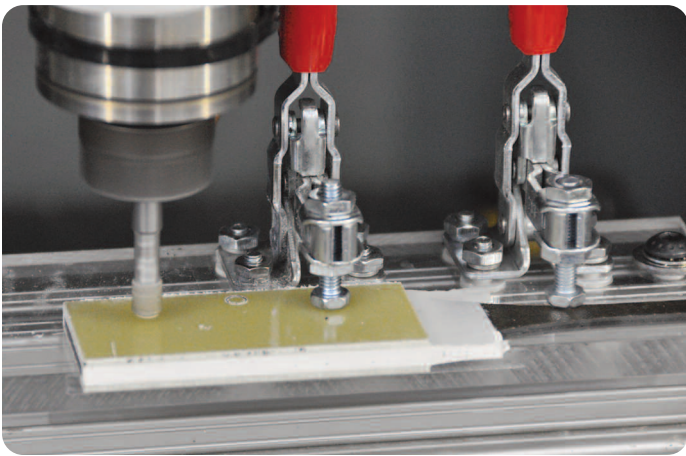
4-axis mill used by SES to machine grip areas of test specimens.
